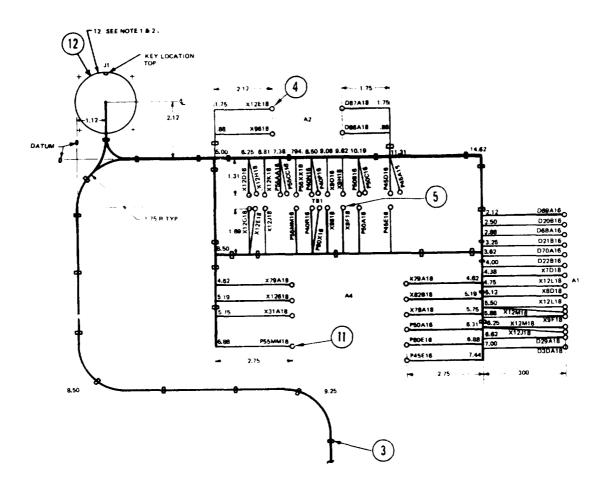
Control Cubicle Wiring Harness (Sheet 5 of 6) Drawing No. 69-677
